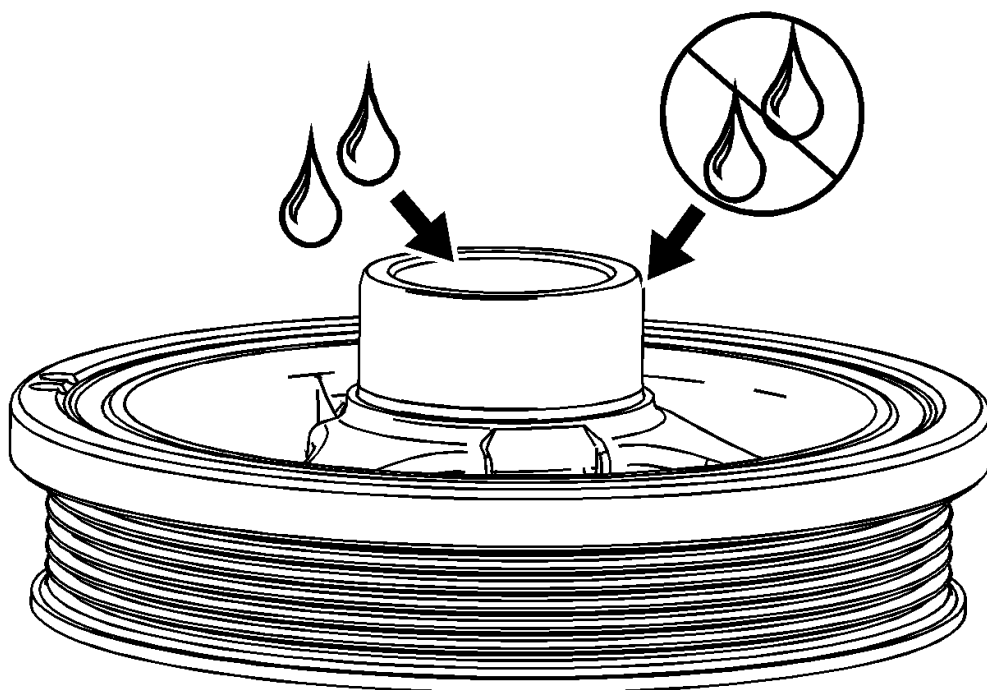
Identifying Lubrication & Non-Lubrication Areas On Crankshaft Balancer
